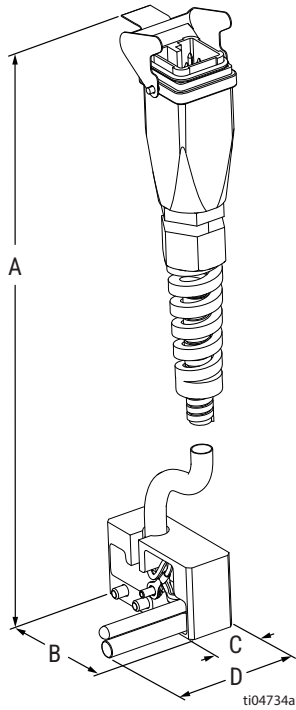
Mounting Dimensions for Tip Seal iQ Dispense Valve
